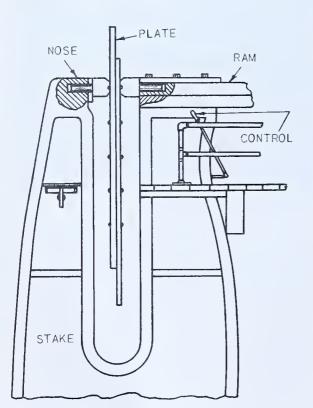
Hydraulic Riveter with Plate Between Jaws
